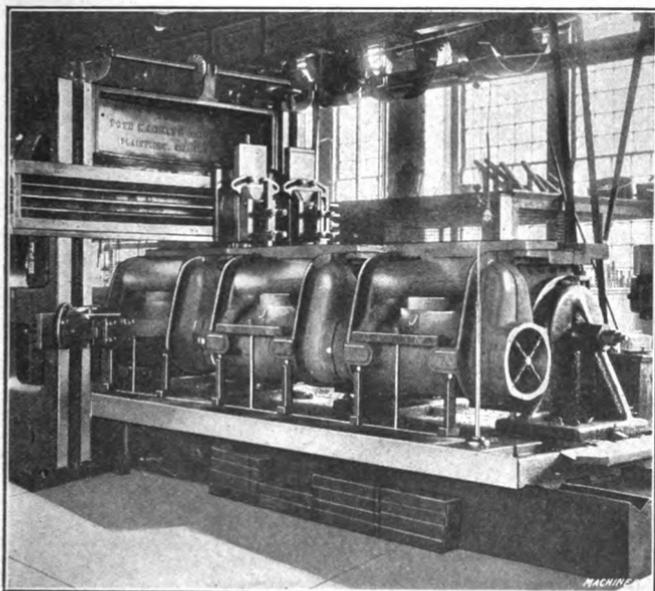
Another View of the "Three-piece" Cylinders set up for Planing
